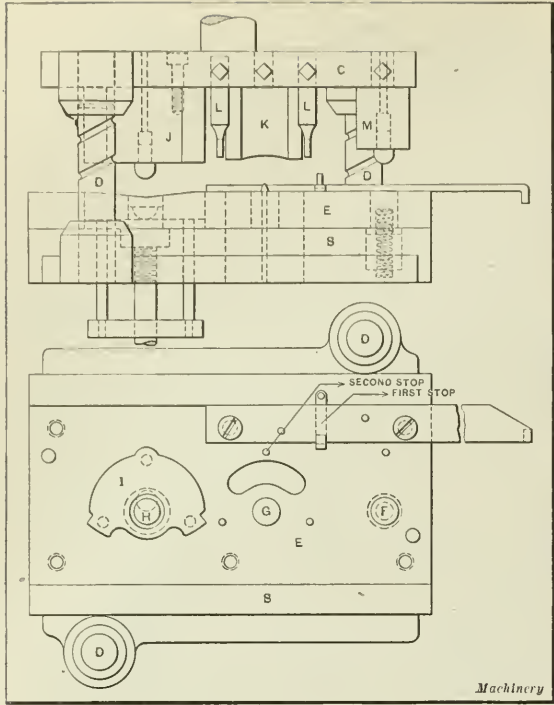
Punch and Die for making Piece shown in Fig. 1
